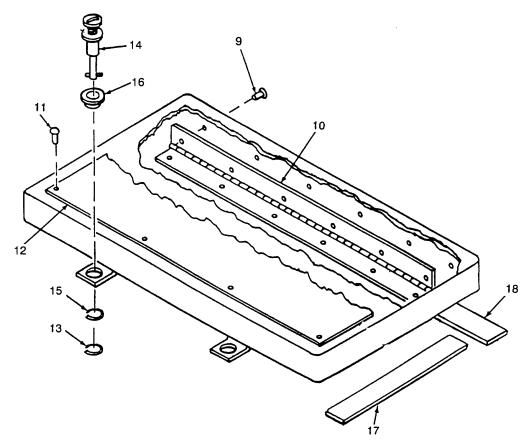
Control Box Assembly (Sheet 1 of 2)
